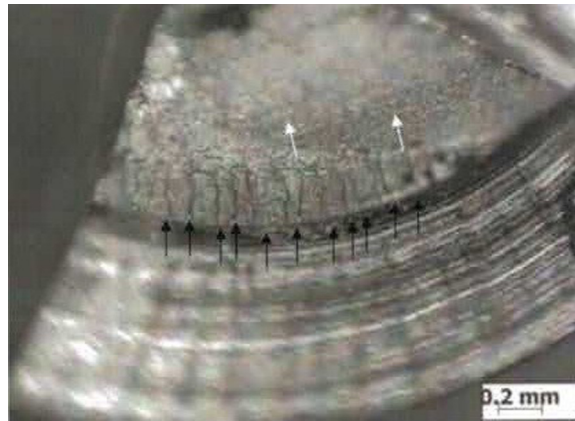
Stereoscopy. Crack shown is Fig. 12 after cutting a normal section [26].
